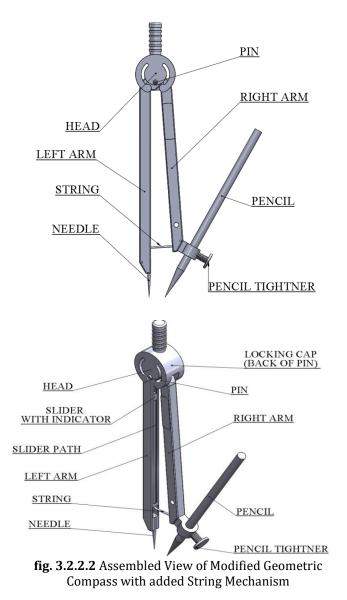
Parts of Modified Geometric Compass with added String Mechanism
